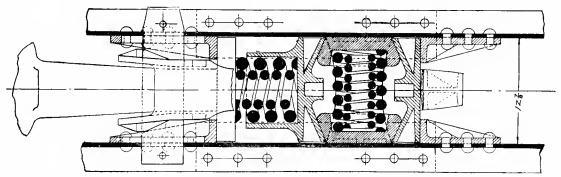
Butler Friction Draft Gear No. 350 Applied to Freight Car.
